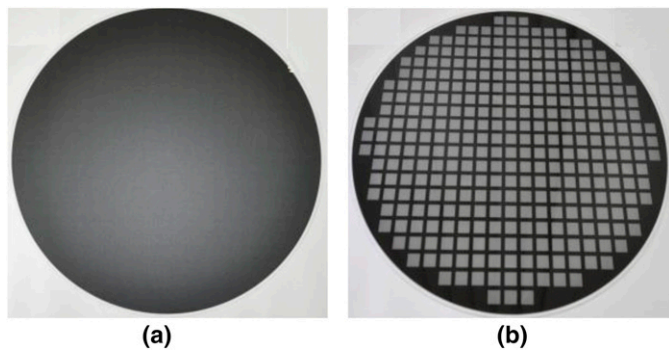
(a) Top view of a molded reconstituted wafer. (b) Bottom view of a molded reconstituted wafer without the LTHC layer so we can see the test chips.
